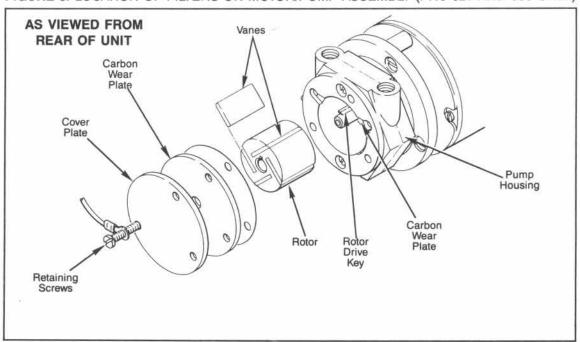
PUMP HOUSING ASSEMBLY (PRC-621 AND 630 ONLY)
